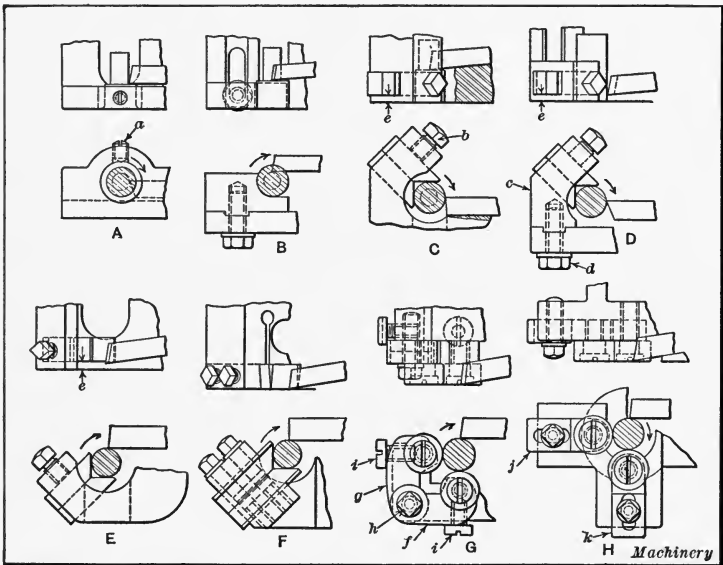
Methods of Holding and Adjusting Box-tool Supports
